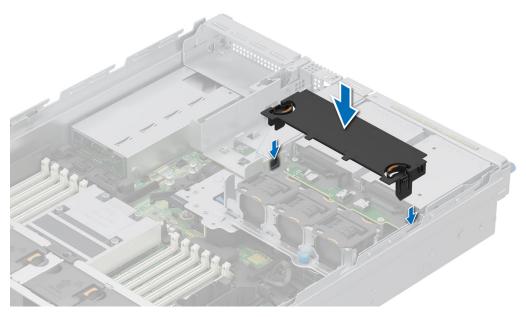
Installing the 4×2.5 -inch rear drive module air shroud
